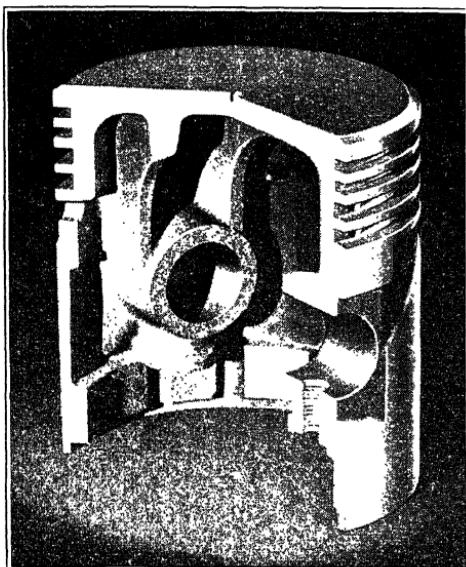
Oldsmobile Piston Showing Thick Skirt and
